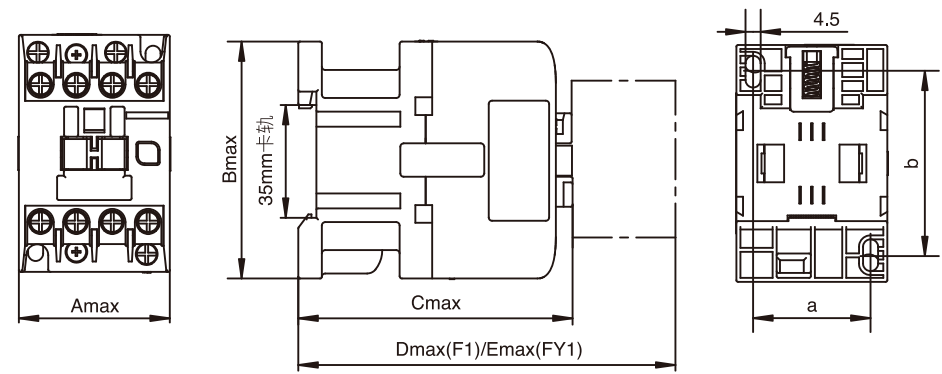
TGC1s-09~38 outline and installation dimensions drawings
